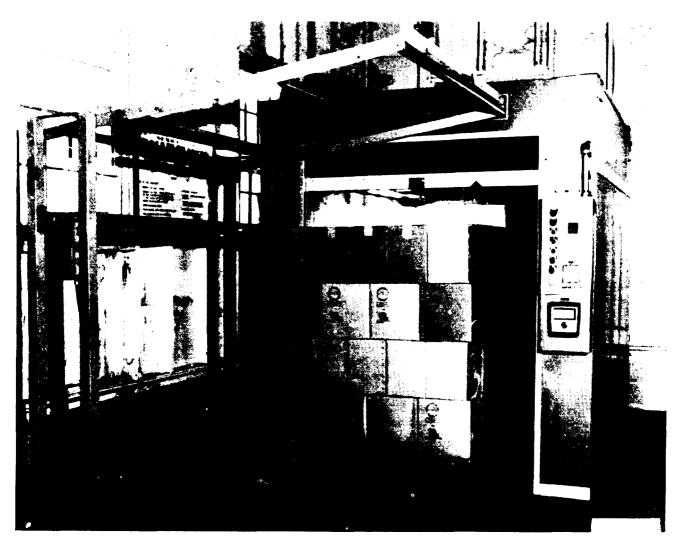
Shrink film chamber used for heat shrinking film around palletized load.
